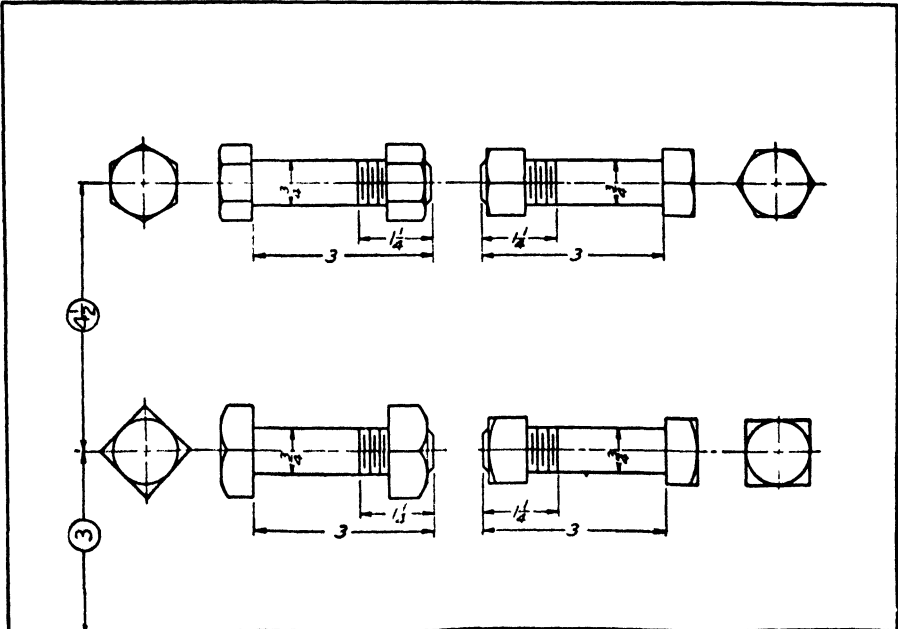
Prob. 223. Draw the American Standard bolts and nuts in the positions indicated.
